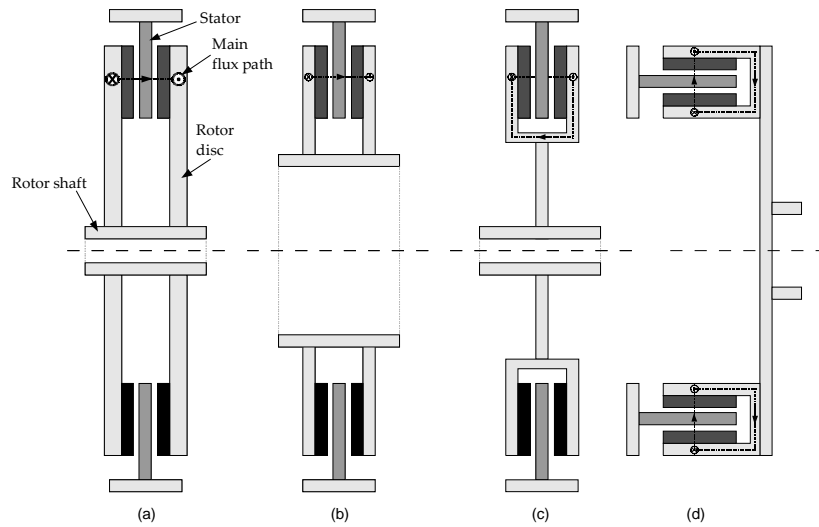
Cross section of double sided axial-flux machine (a) Baseline design (b) Increasing rotor shaft radius means that the thickness of the rotor discs can be reduced (c) C-core machine with extra flux path (d) Radial-flux C-core machine.
